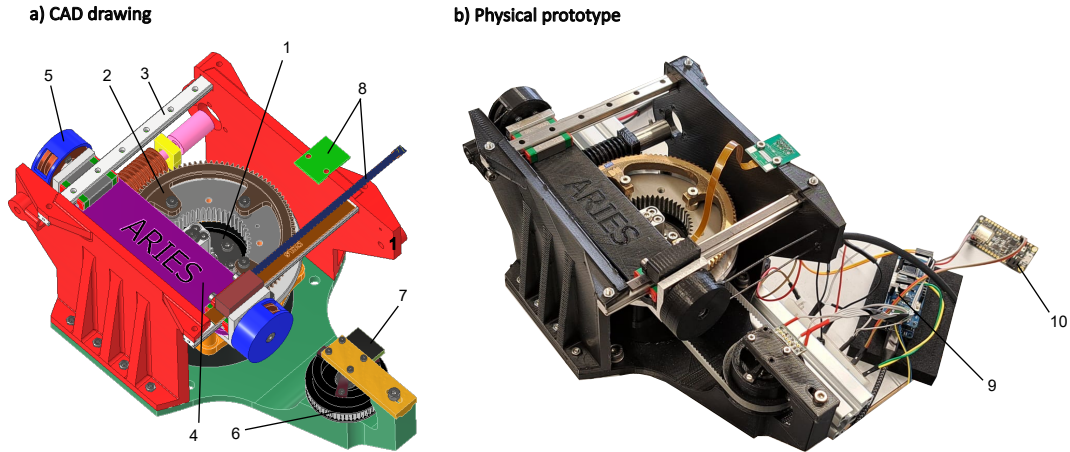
a) CAD drawing and b) Physical prototype of the device. The labels refer to: 1) Cardan Gear mechanism; 2) Worm gear mechanism; 3) Slider for linear motion; 4) Linear guide; 5) Pulley for cable; 6) External gear; 7) Rotary Encoder; 8) Linear Encoder; 9) Arduino MKR Wifi 1010; 10) Feather for Bluetooth communication
